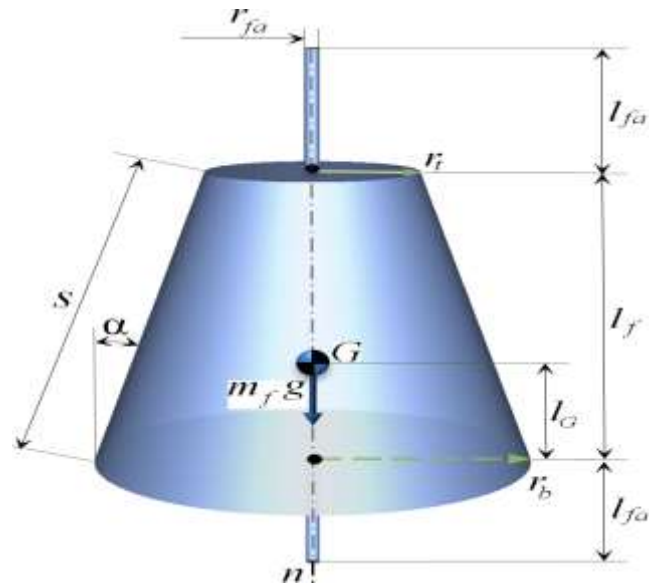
Dimensions of the rear wheel of the Passive Wheeled Robot.
